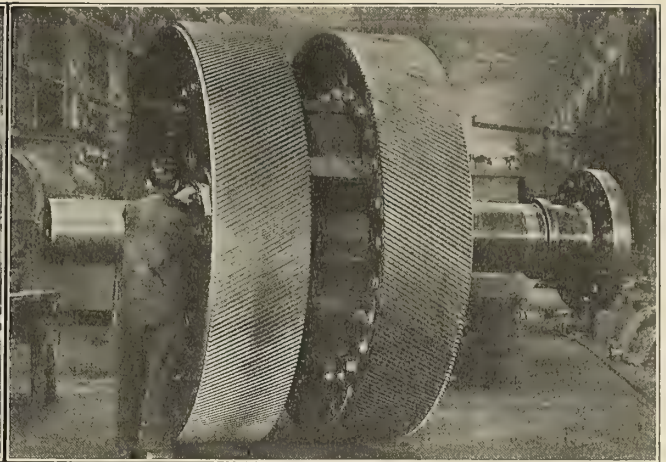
Gear Wheels for 6,000 Horsepower Reduction Gear. Revolutions per Minute, 1,800 to 180; Diameter, 100 inches. This Gear Has Been in Successful Operation for Over a Year and a Half
